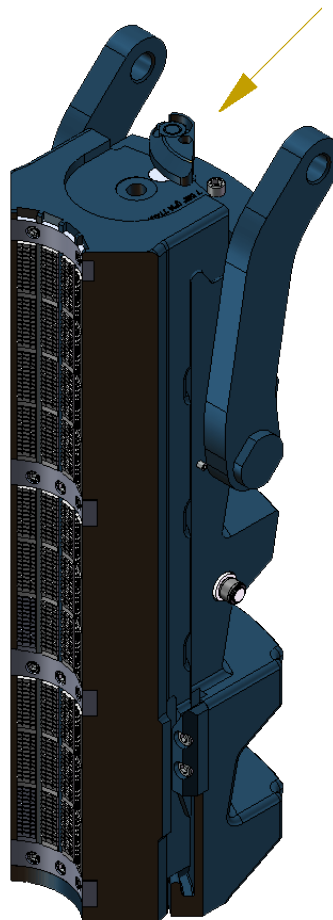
When Installing New Carrier Ensure that It Is Guided Cleanly in Grooves
